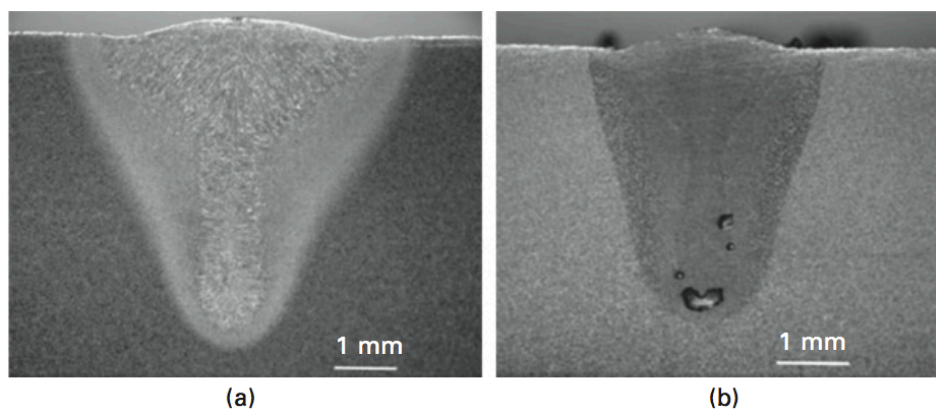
Comparison between (a) laser welding and (b) hybrid laser-arc weld in 250 grade mild steel (44, p. 120)
